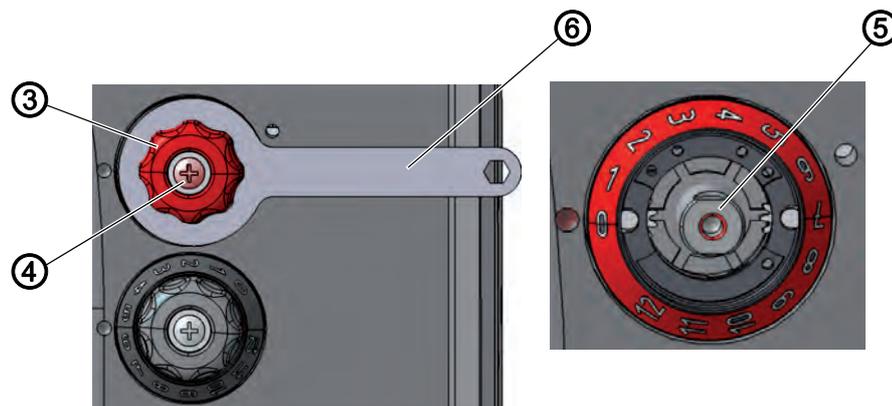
Setting the upper stitch length adjusting wheel (1)
